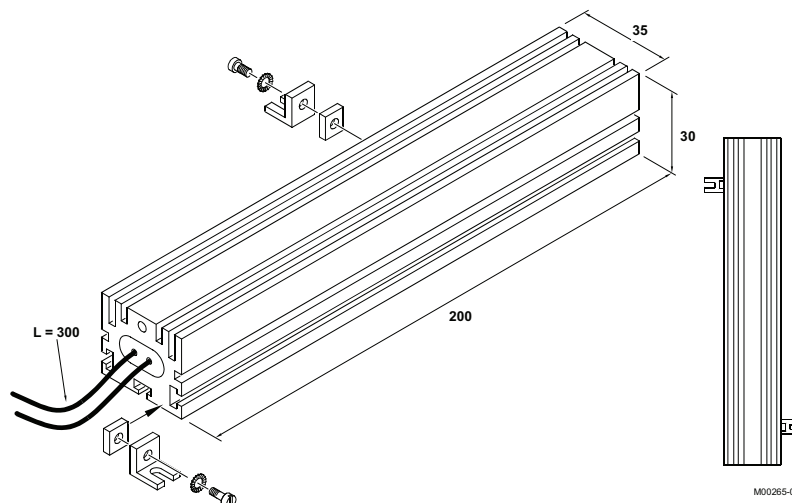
Overall Dimensions, Resistor 56-100Ω/350W
